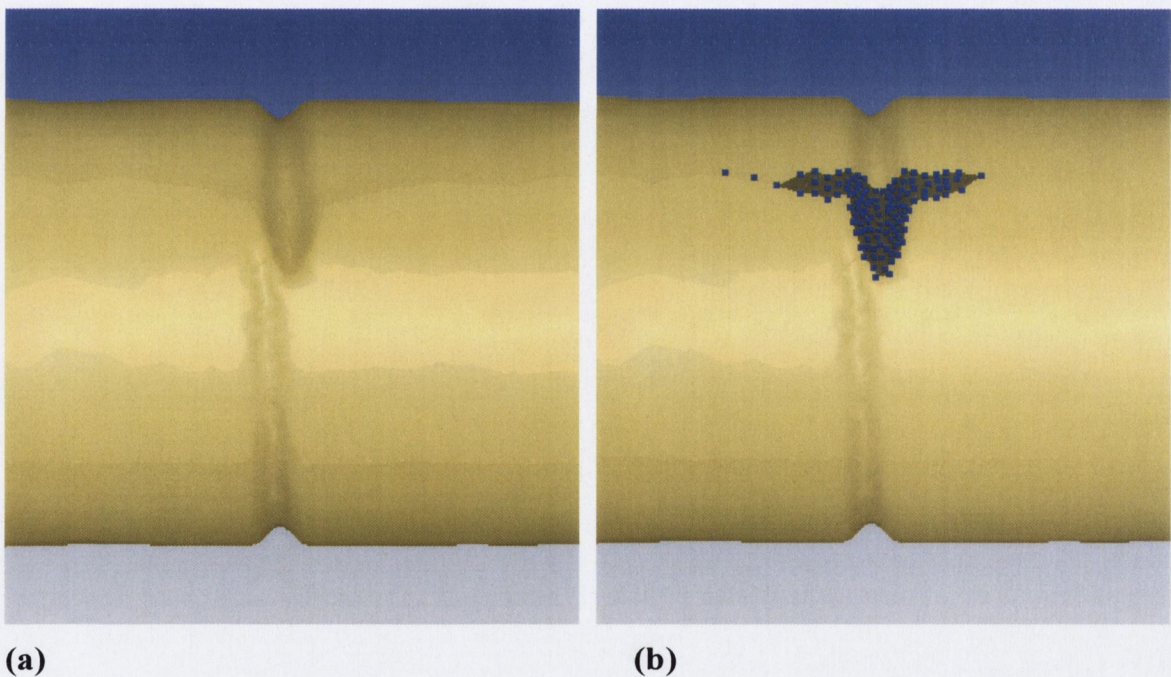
(a) Illustration of the first groove form and (b) area of contact between the workpiece and the bottom die, after 180° workpiece rotation.
